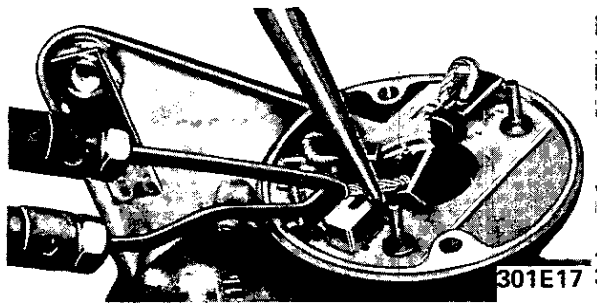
E-1 7 Solder Positive Brush Lead to Brush Holder
